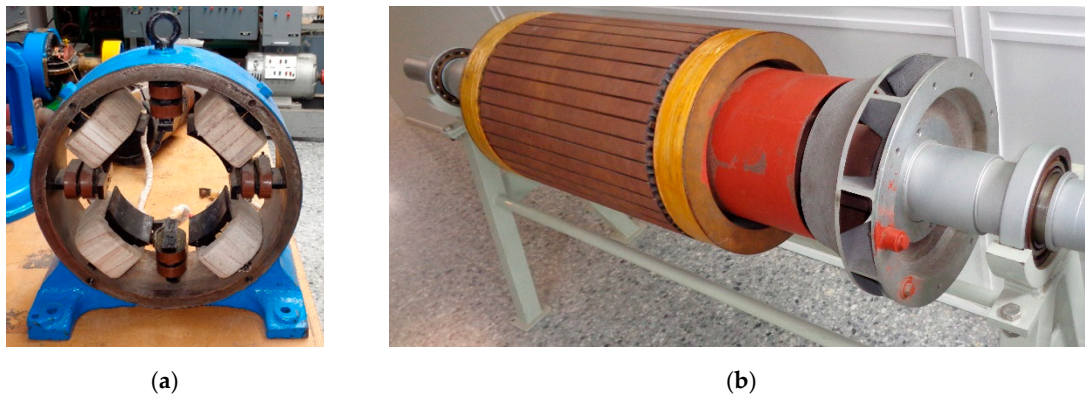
(a) Stator of an electrical machine. (b) Rotor of an electrical machine.
